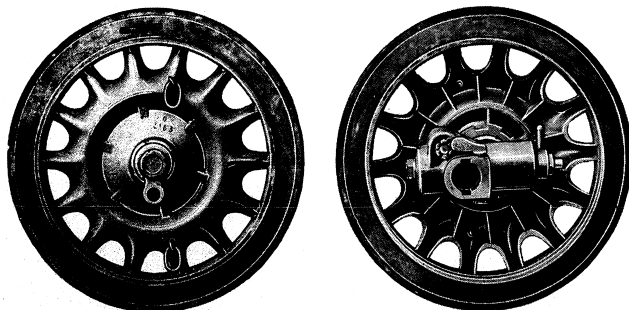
WHEEL WITH SPRING DEVICE FOR WEAPONS B1A2 and B1A3 — GENERAL VIEW
